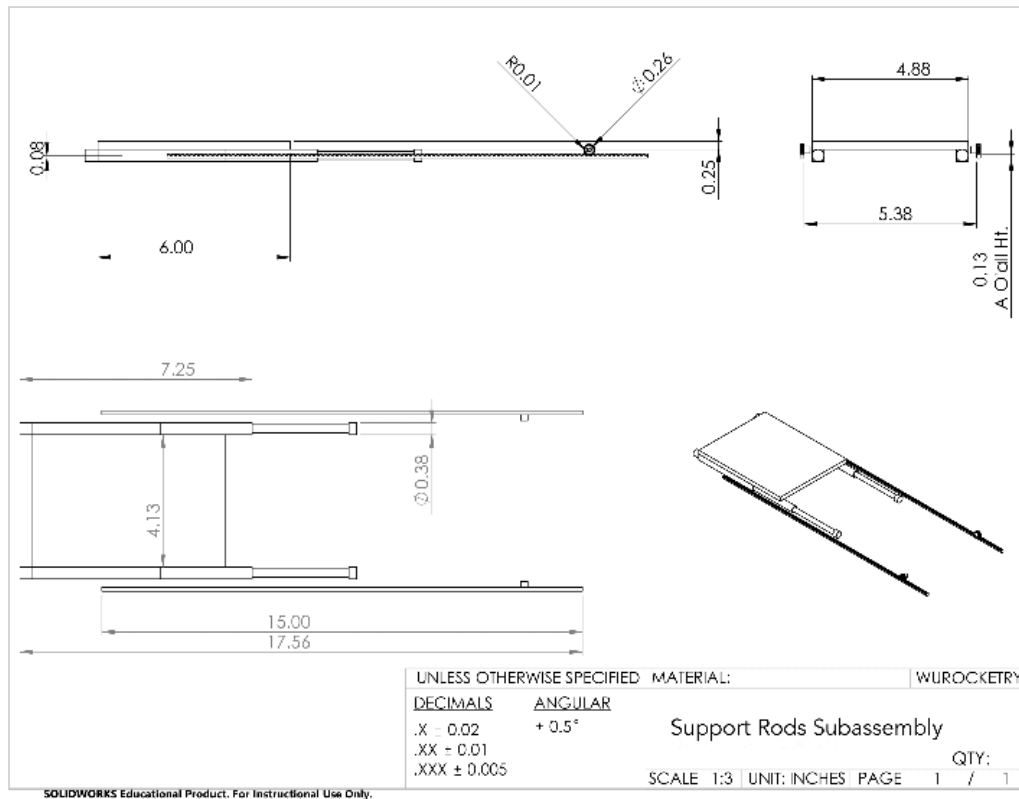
Rack and Pinion with Telescoping Rods Drawing
